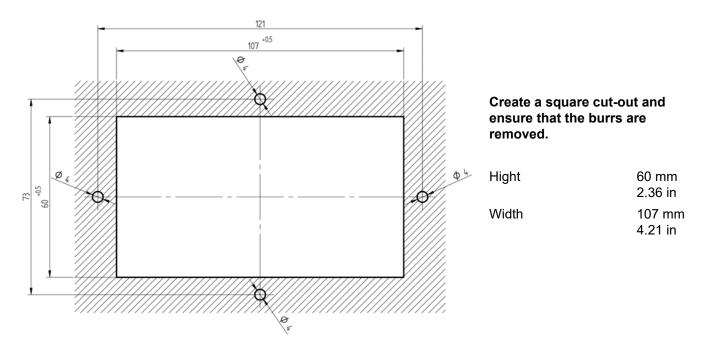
Dimensional drawing panel cut-out including mounting bore for the IP65 cover
